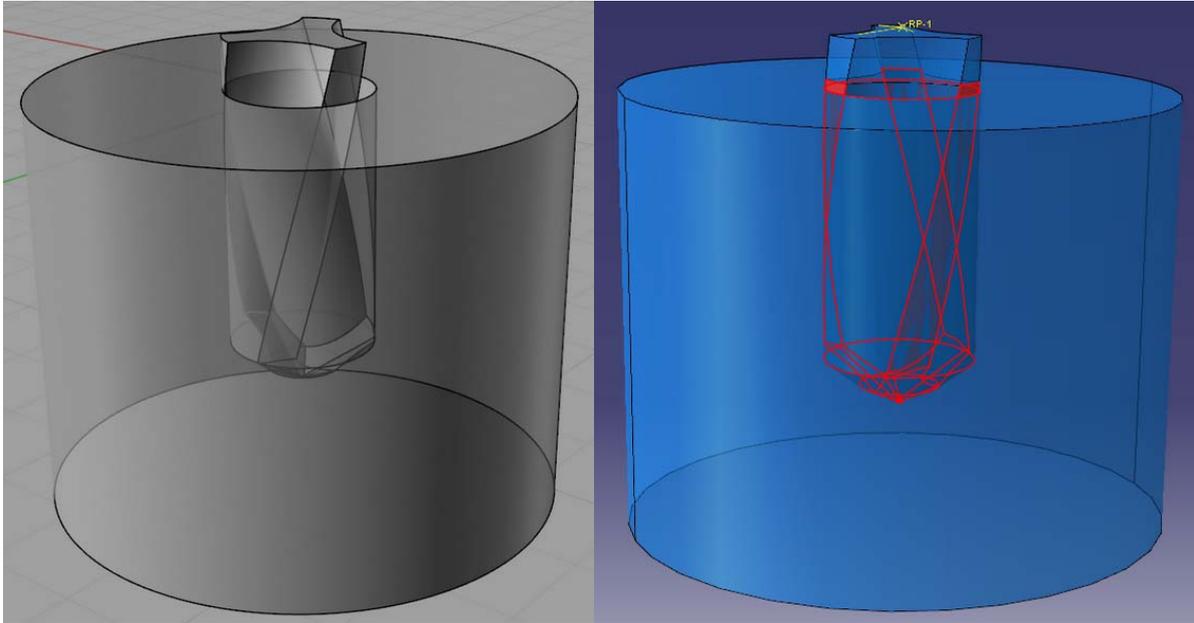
Assembly and contact surfaces and reference point of the drill.
